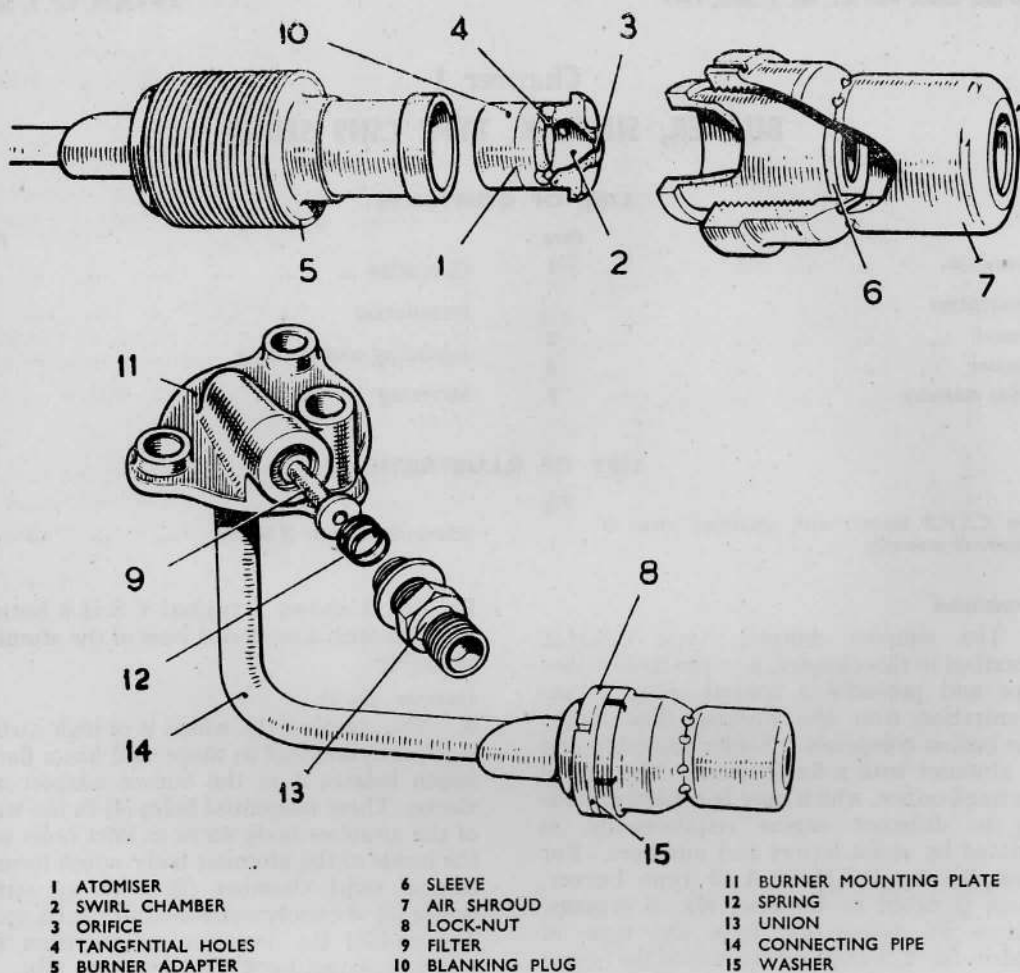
Type C.S.H.9 burner with sectioned view of atomiser assembly
